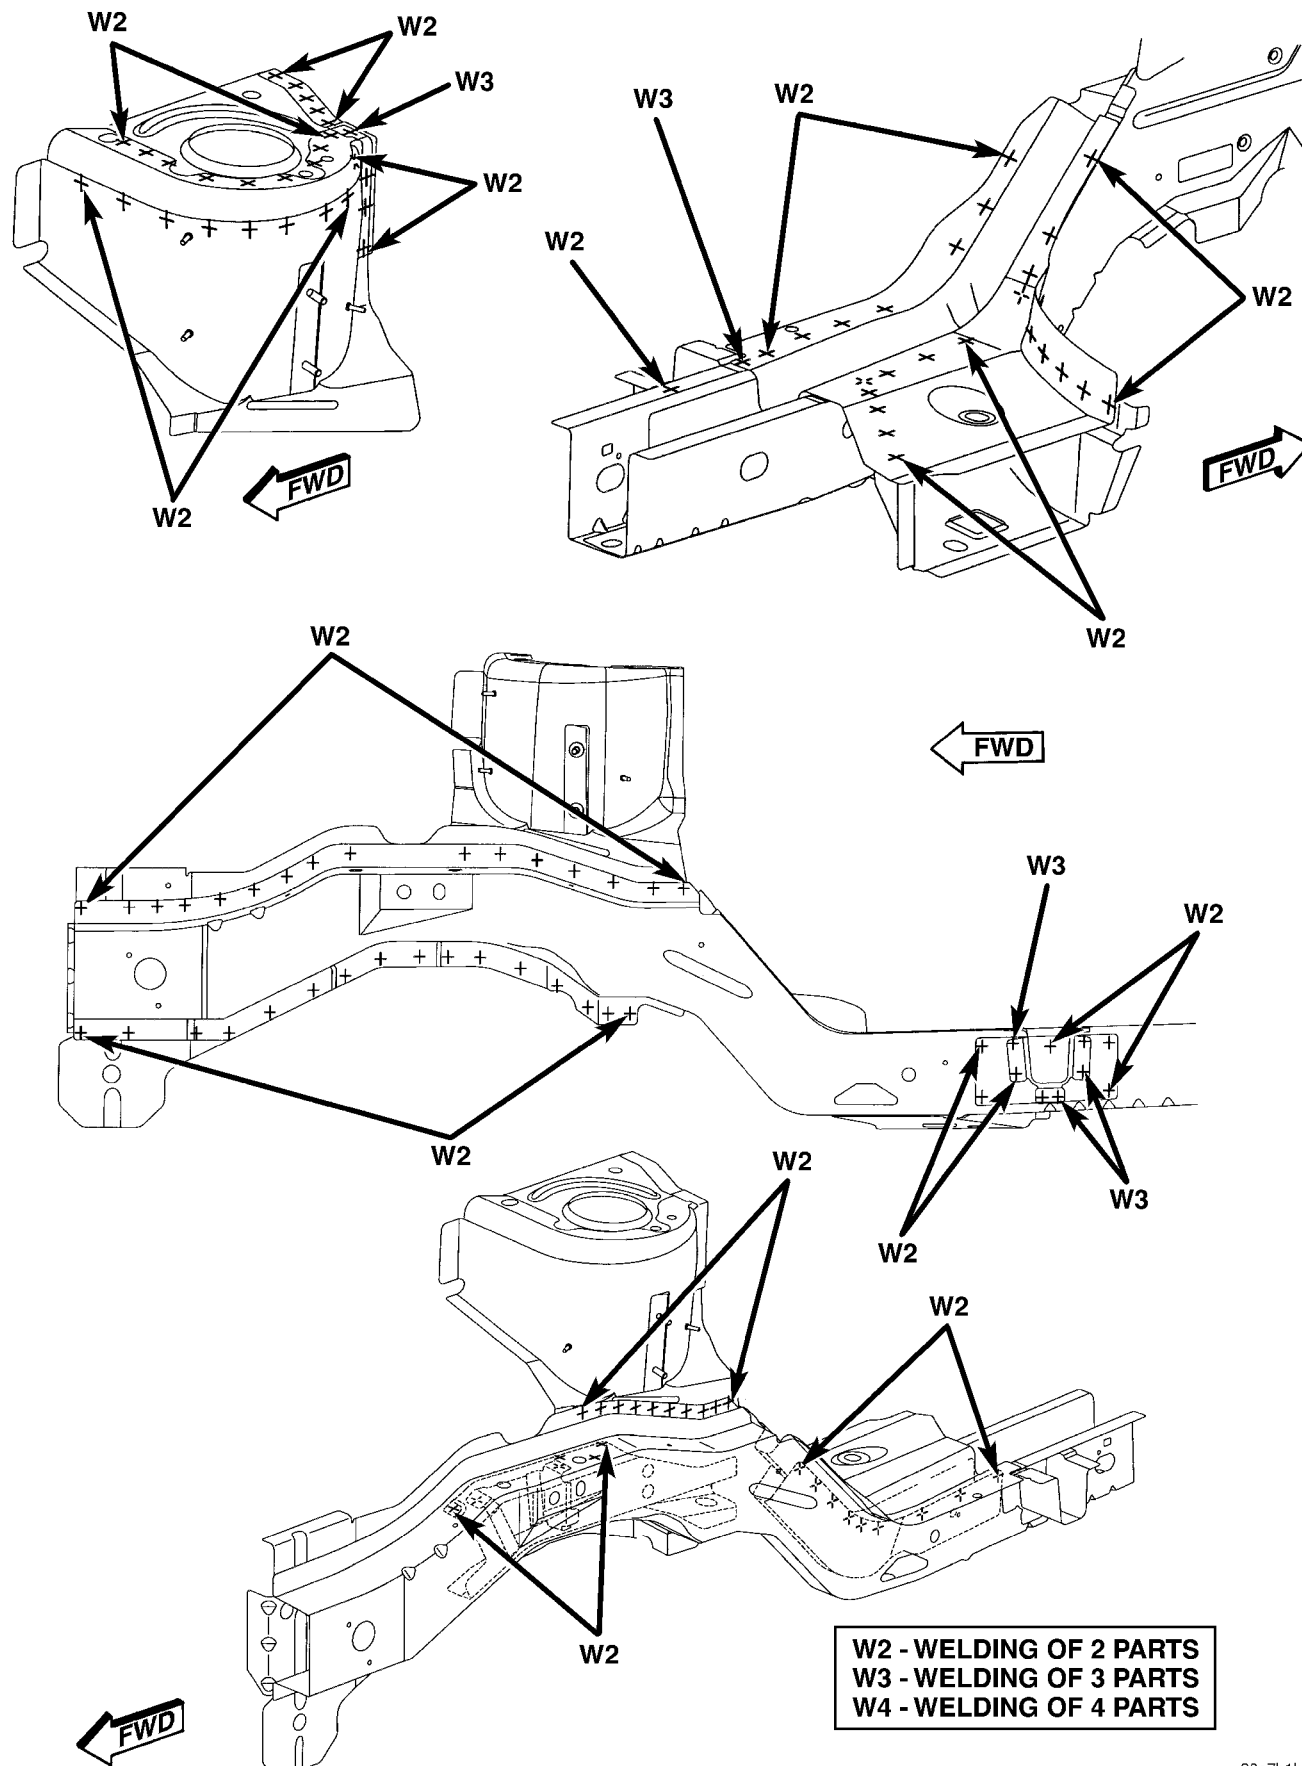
SUSPENSION RETAINERS AND REINFORCEMENTS - RIGHT
